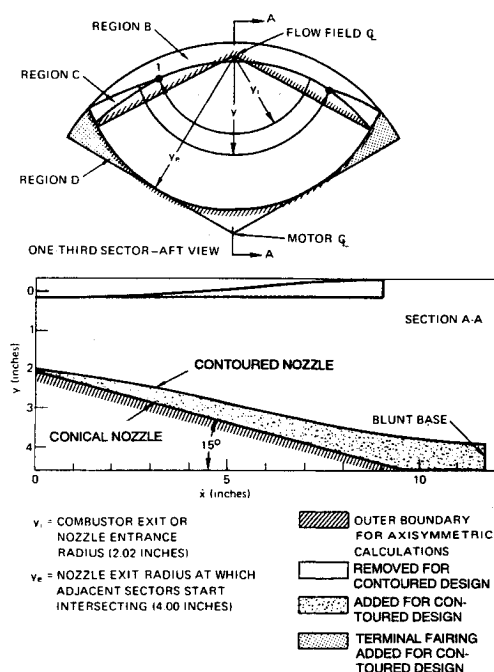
SCRAM engine test model exhaust nozzle designs.
